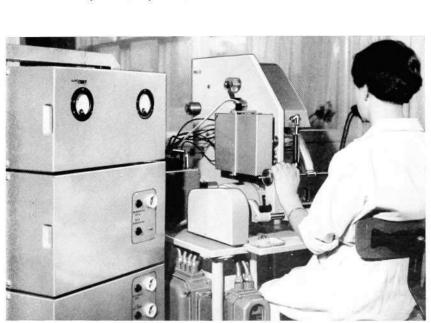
X 6827 Winding machine for polystyrene capacitors
